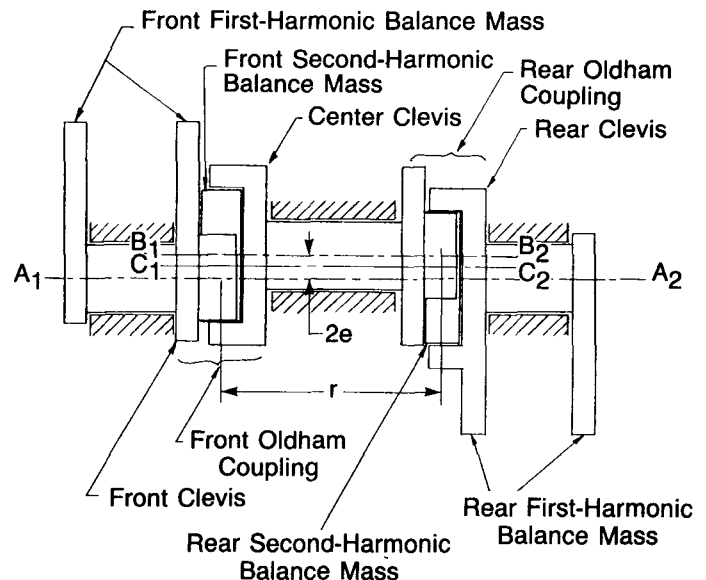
Schematic Cross-Section of Oldham-Coupling Balancer for 90° V6 Engine.
